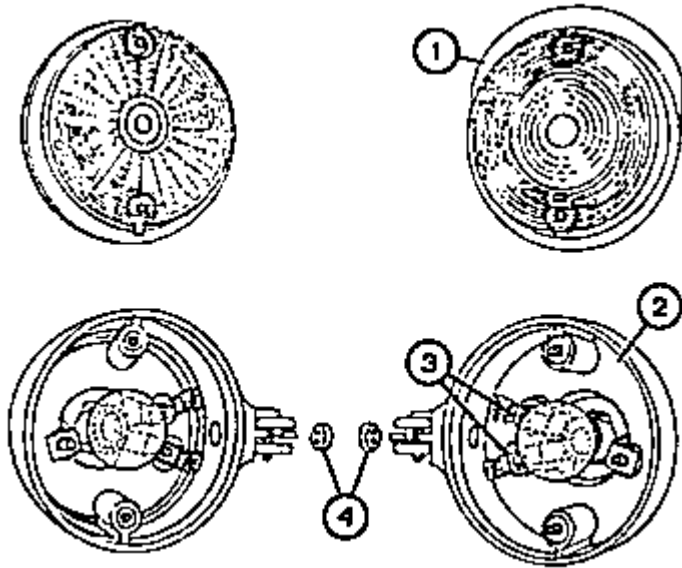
Flashing-light direction indicators (on the left rear, on the right front)
